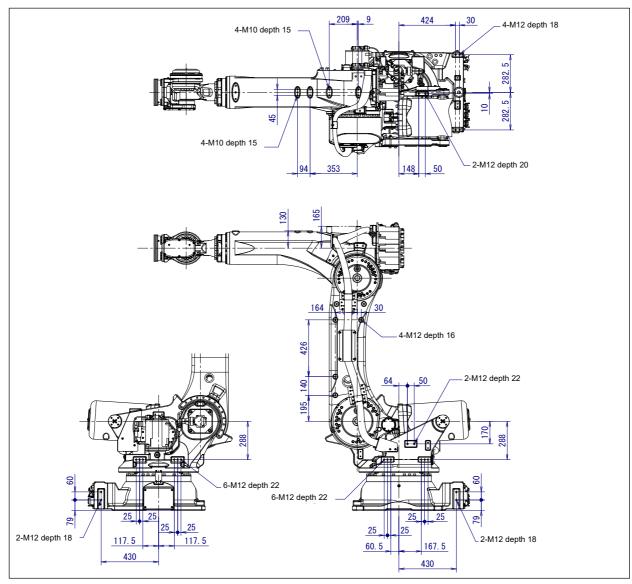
(e) Equipment mounting faces (R-2000*i*C/270F/210L/190U)
